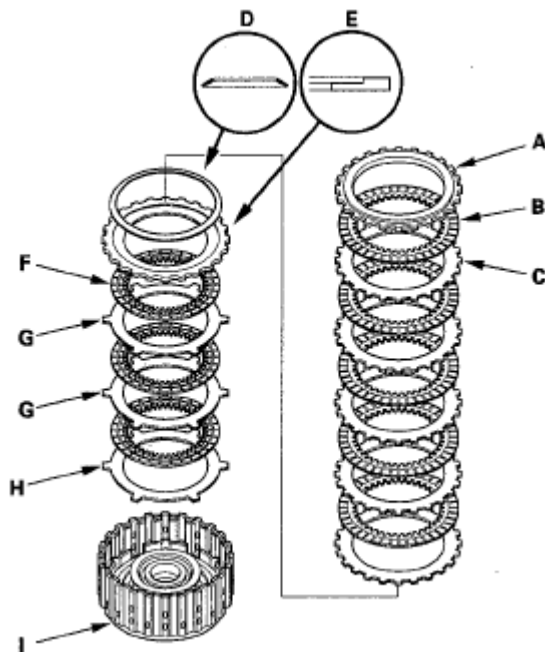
Disassembling 1st/1st-Hold Clutch Drum
